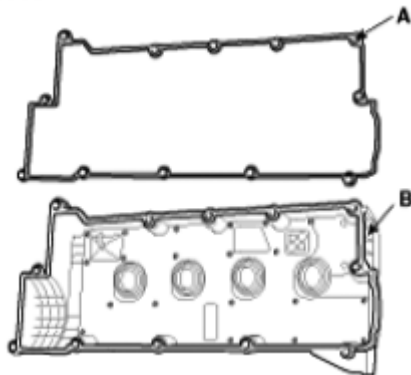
Identifying Cylinder Head Cover Gasket And Cylinder Head Cover
